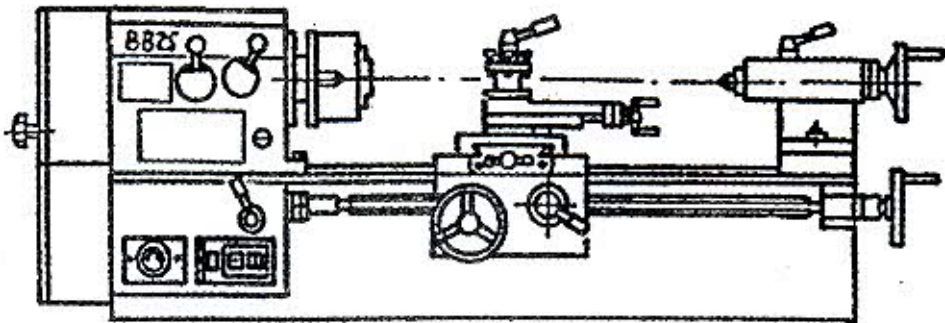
5 BV25B - 1 CUTTING MACHINE (LONGITUDINAL LEADSCREW WITH HANDLE)
